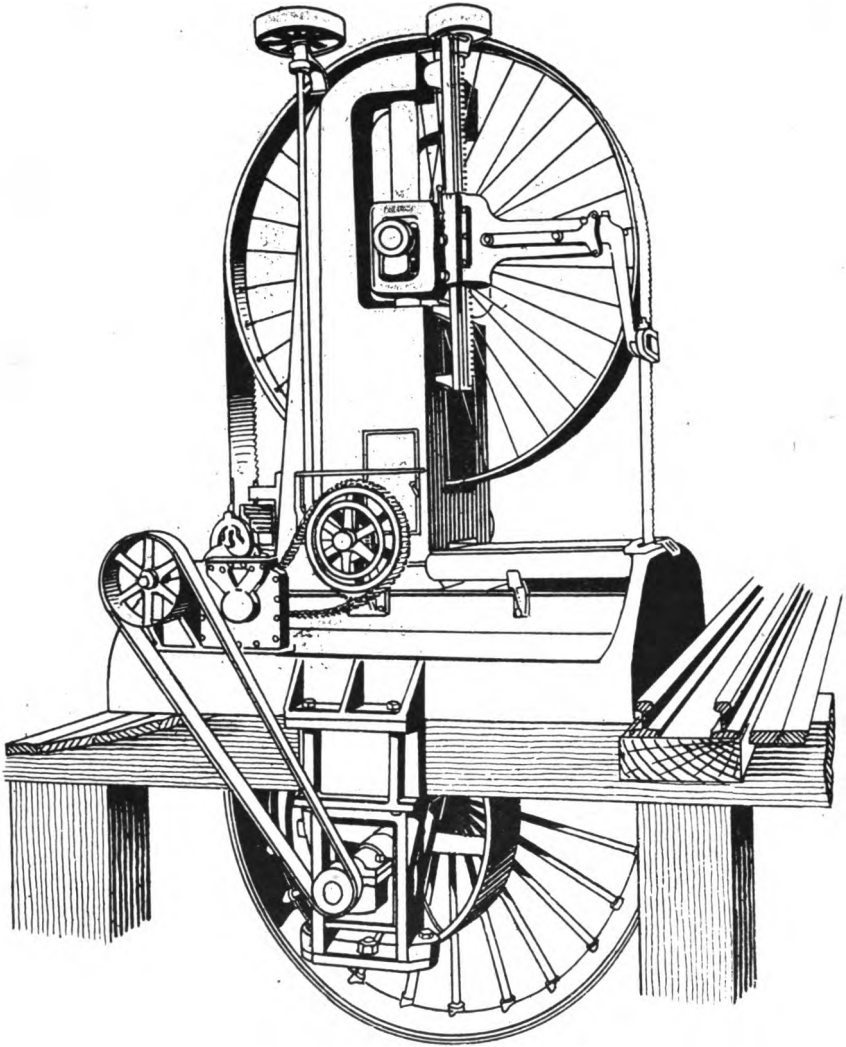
Left hand single-cutting band headsaw, 10 ft. wheels.
